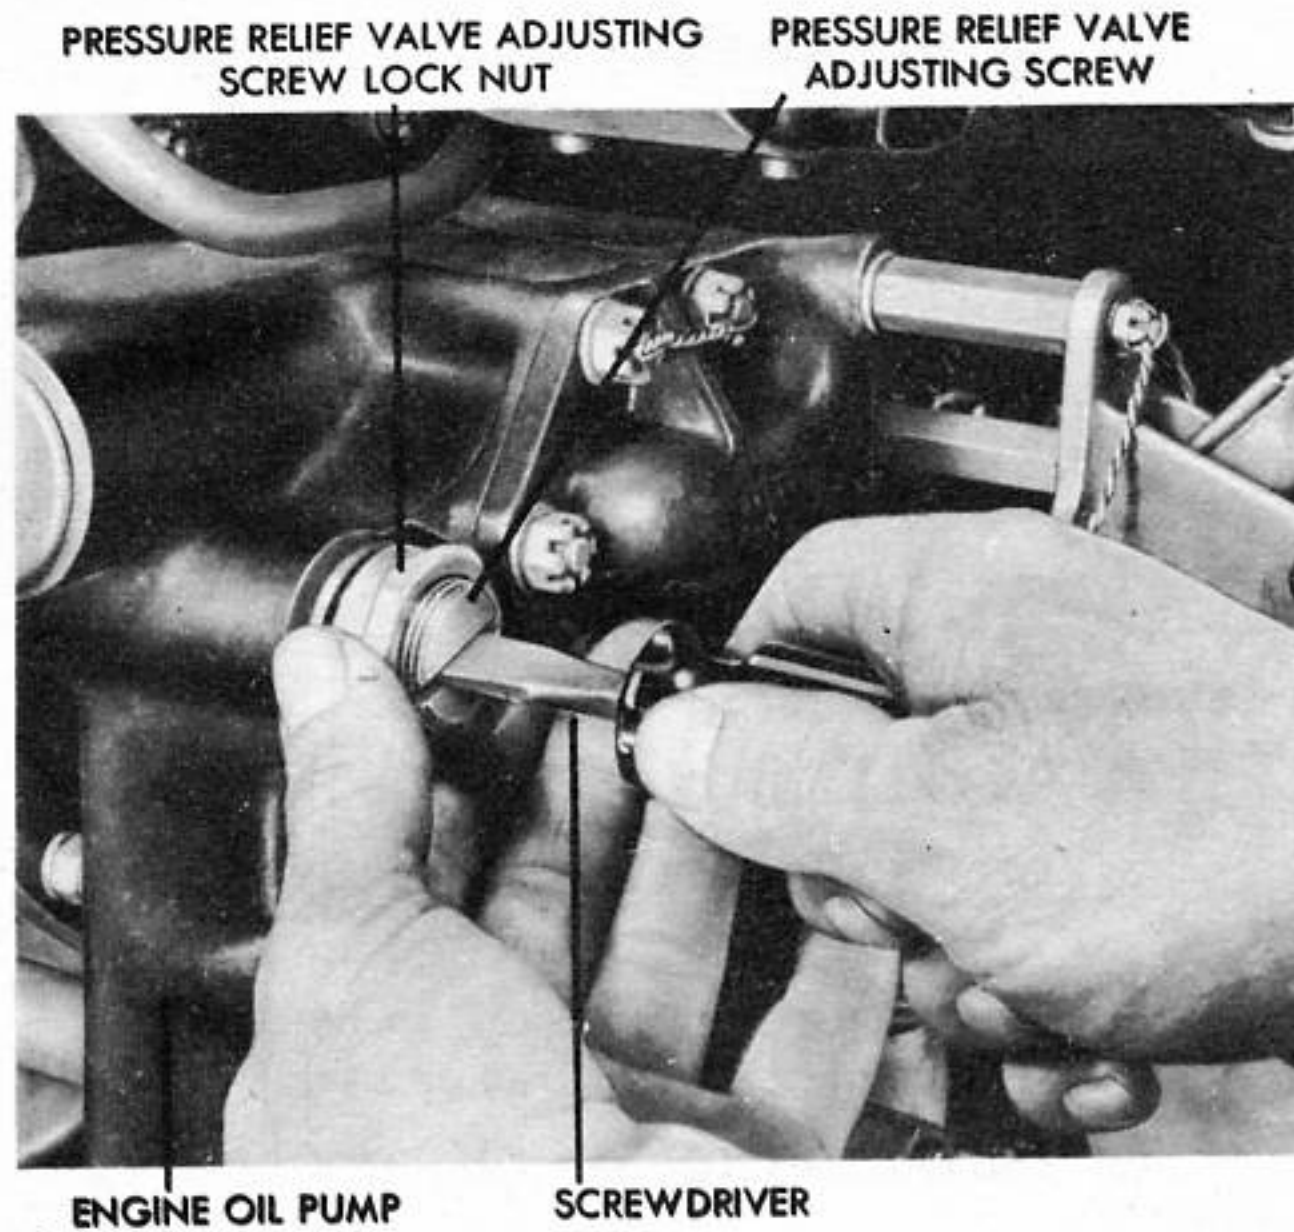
ADJUSTING OIL PRESSURE RELIEF VALVE
